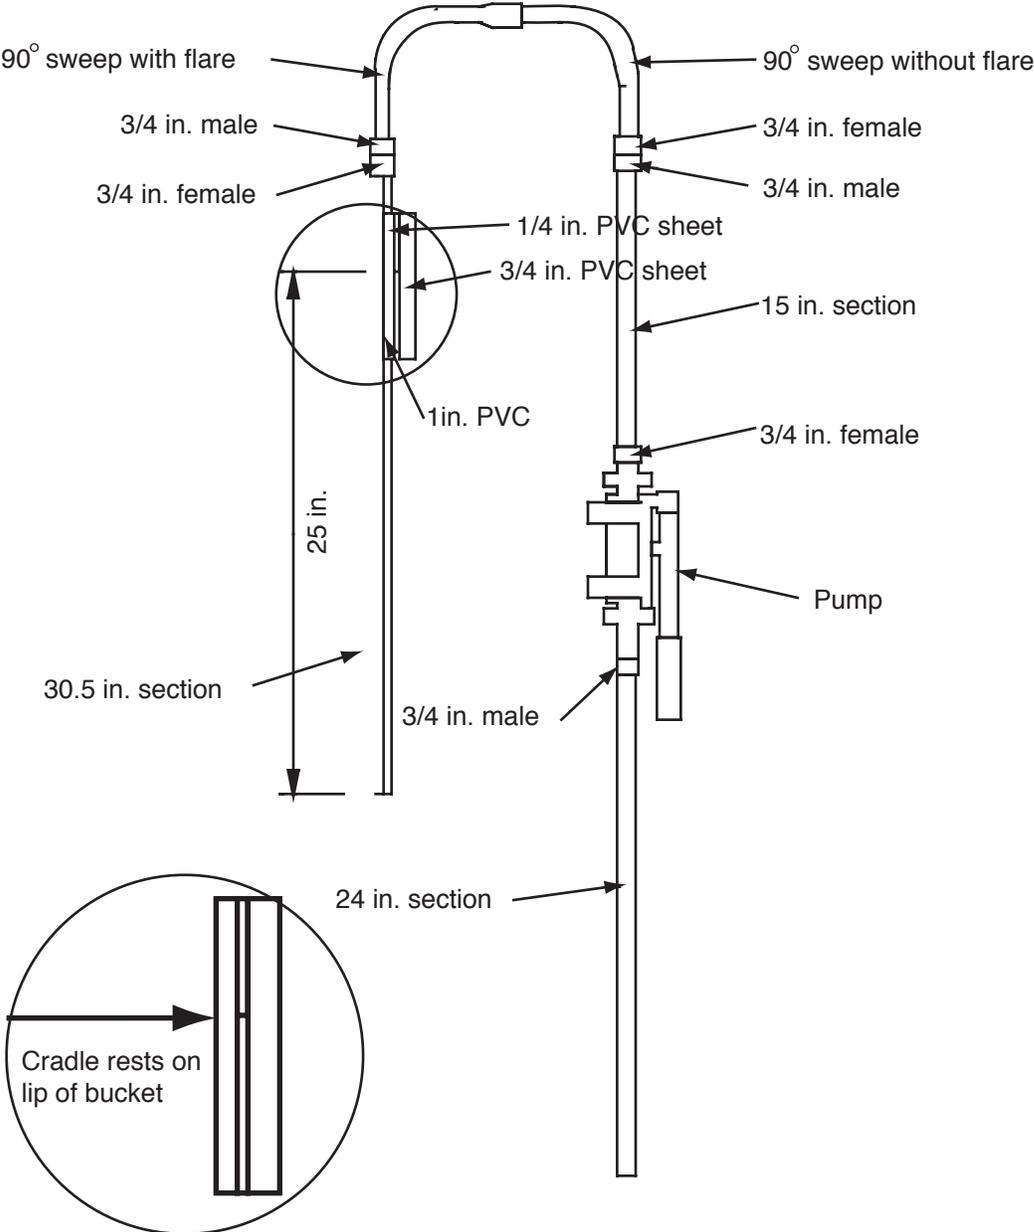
Depiction of assembled parts of the Geonor drain pump. The 25-inch measurement on the left leg of the pump is a critical measurement since that is the section inserted into the Geonor bucket and the length ensures the pipe will not strike the bottom of the bucket.
